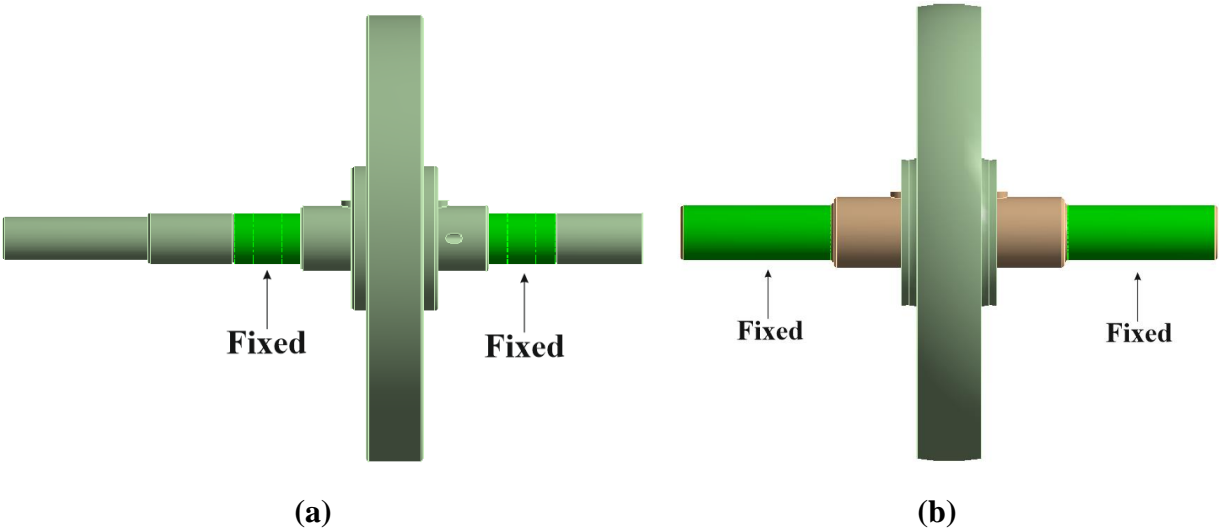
Boundary conditions for the wheel (a) and rail (b) roller assembly
